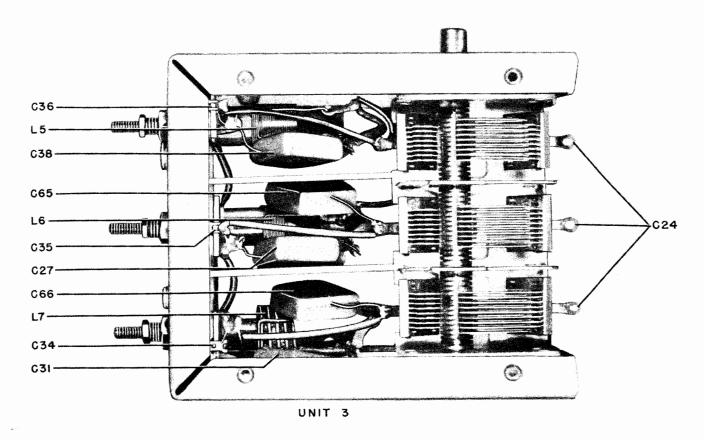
Radio Frequency Oscillator O–165/UR, Multiplier Tuning Assembly, Right Side
